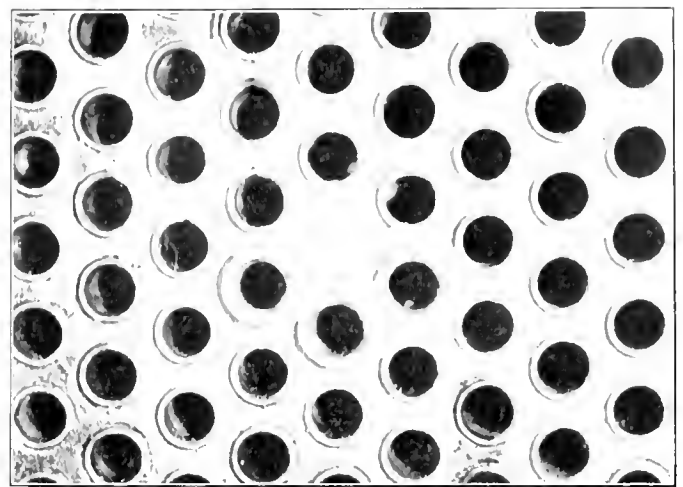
Welded Tubes After Being Chipped and Trimmed.
